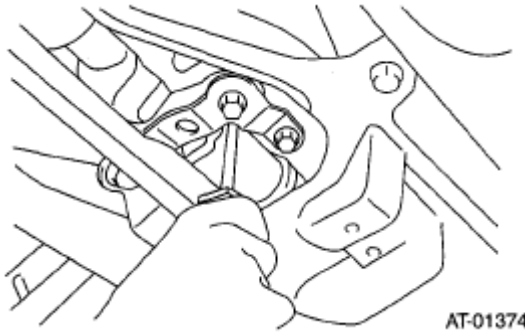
Removing Clutch Housing Cover Securing Bolts (2 Of 2)
